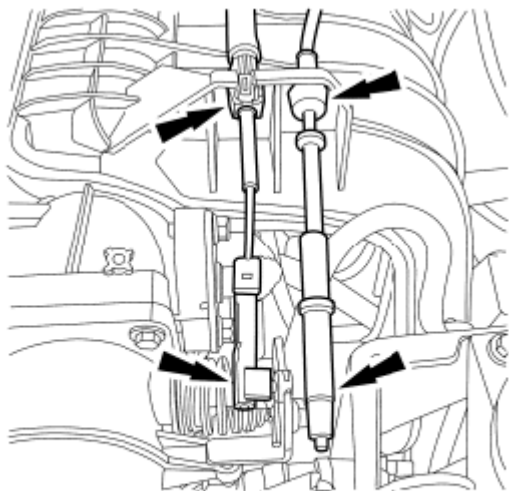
Locating Power Steering Pressure Switch Electrical Connector And High-Pressure Power Steering Tube
